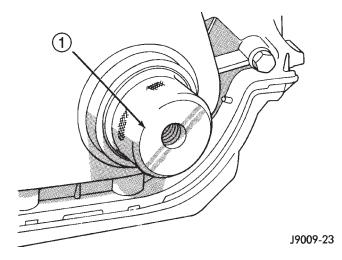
Timing Case Cover Alignment and Seal Installation Tool 6139
